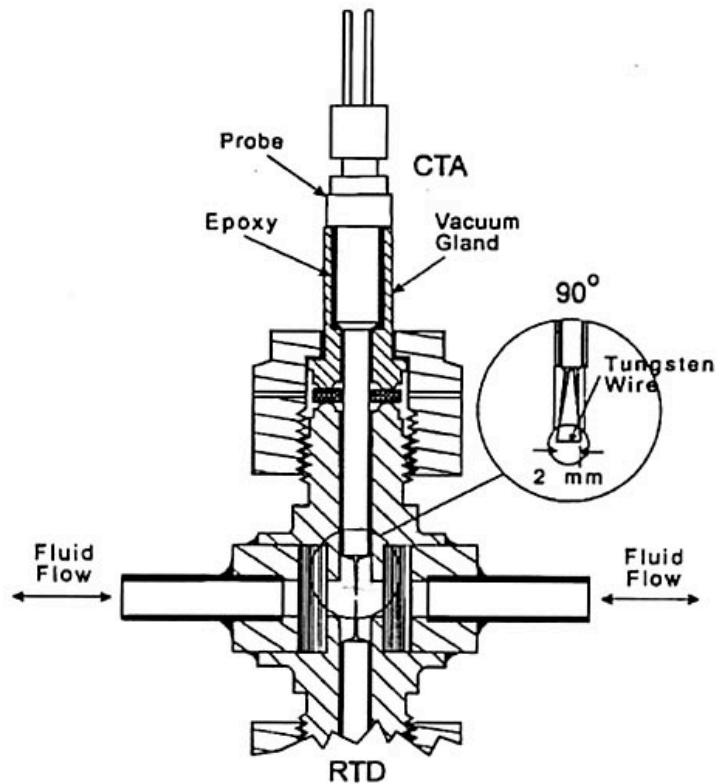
MODIFIED VACUUM ASSEMBLY WITH CTA AND RTD PROBES IN PLACE
